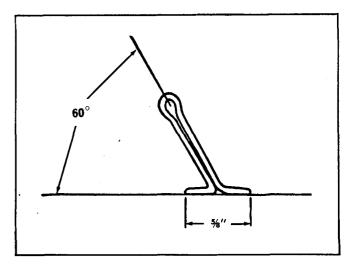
Tool for Removing Upper Half of Main Bearing
